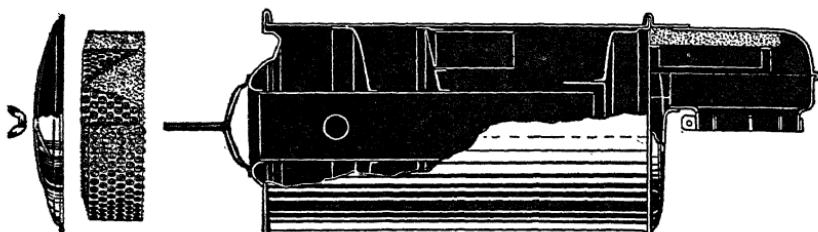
Buick Series 60-80-90 Air Cleaner (Regular)
